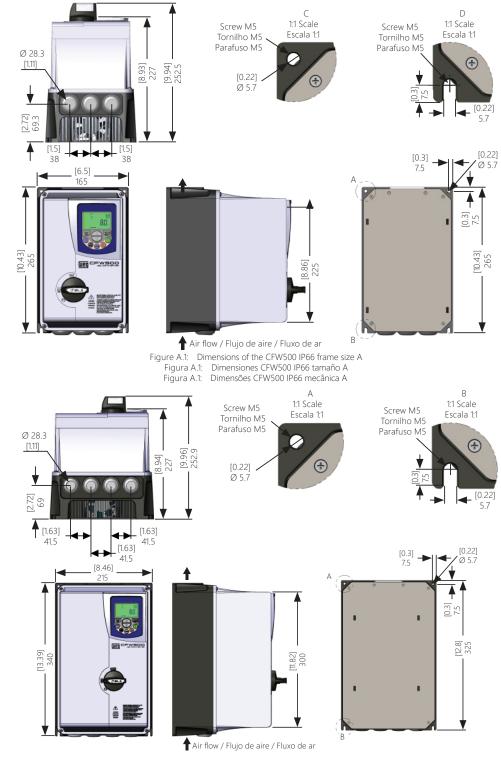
Dimensions of the CFW500 IP66 frame size B Figura A.2: Dimensiones CFW500 IP66 tamaño B Figura A.2: Dimensões CFW500 IP66 mecânica B
